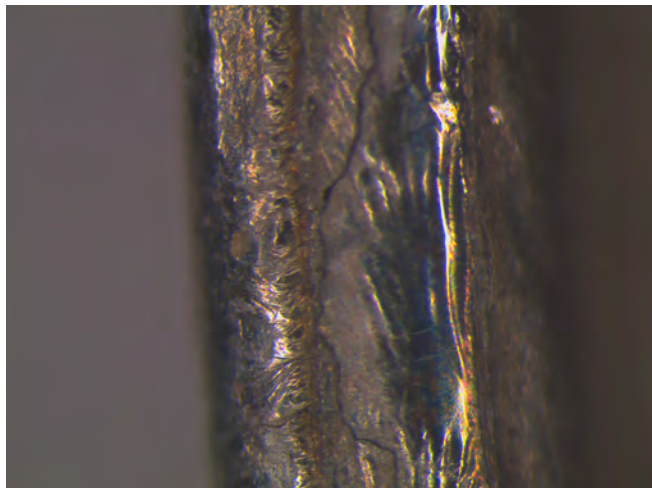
Representative close-up of fracture surface using stereomicroscopy.
